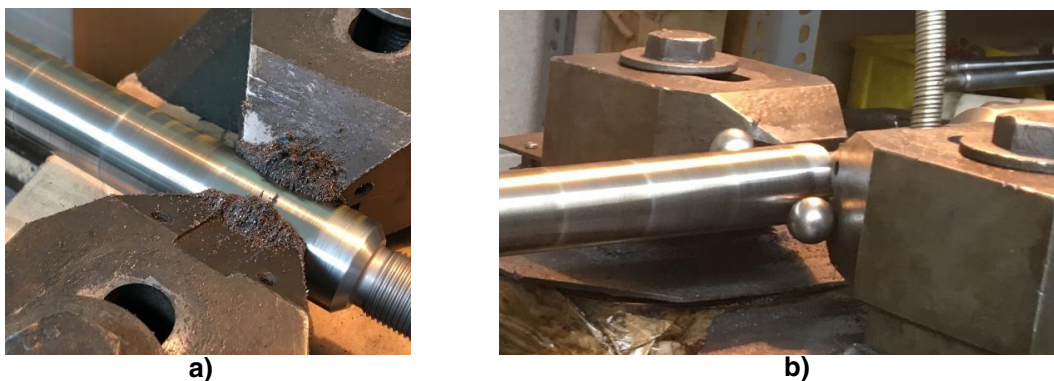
(a) Polishing of the rolled surfaces and (b) roller burnishing of the polished surfaces
